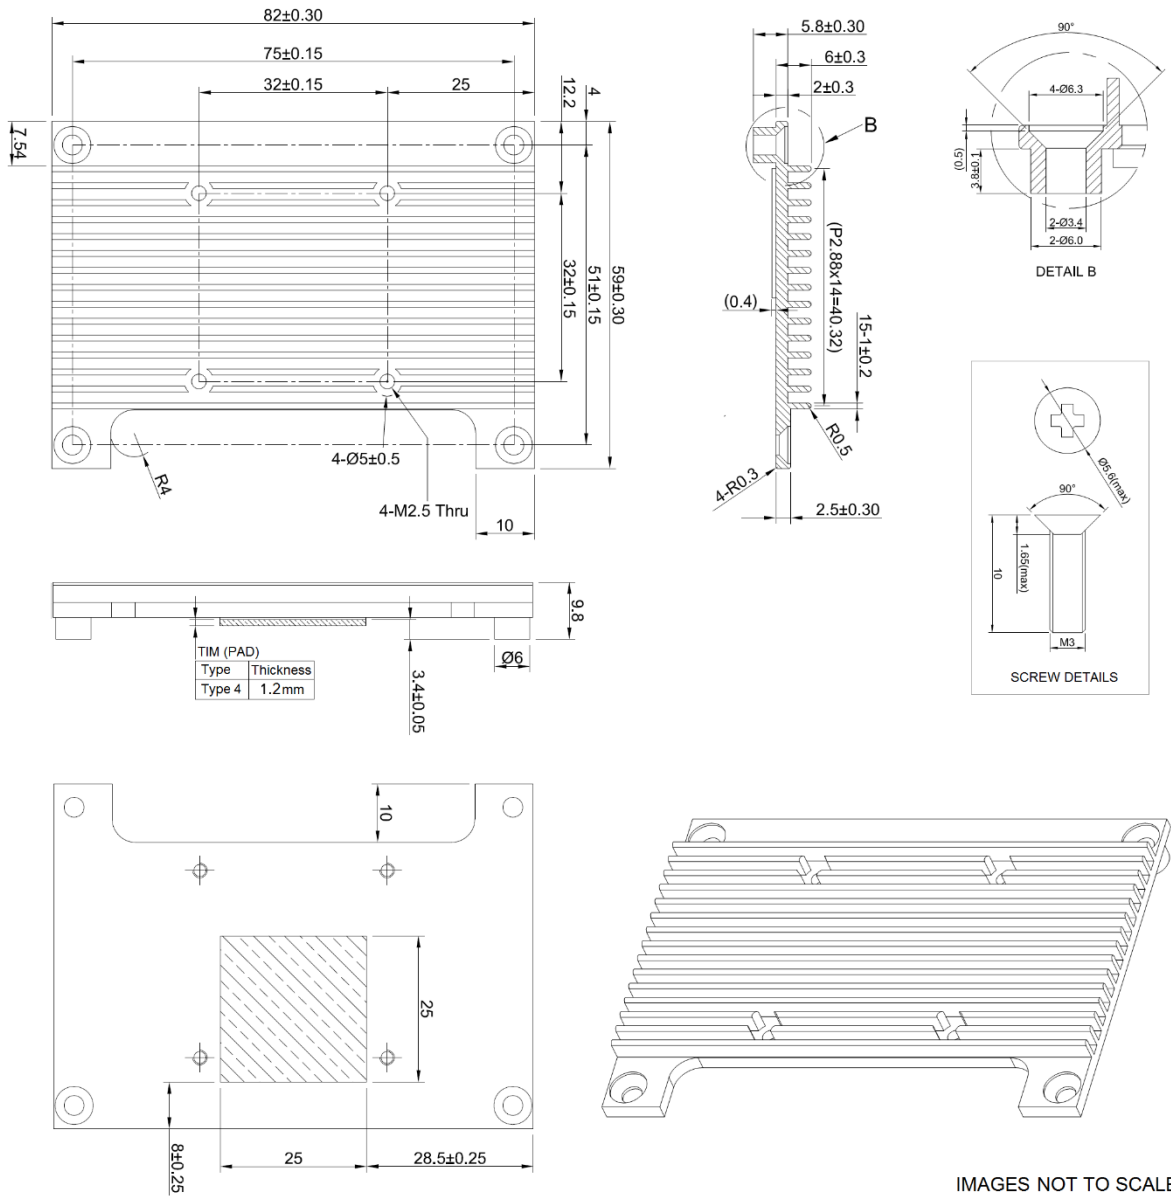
B: Apalis Heatsink Dimensions (Type-4)
